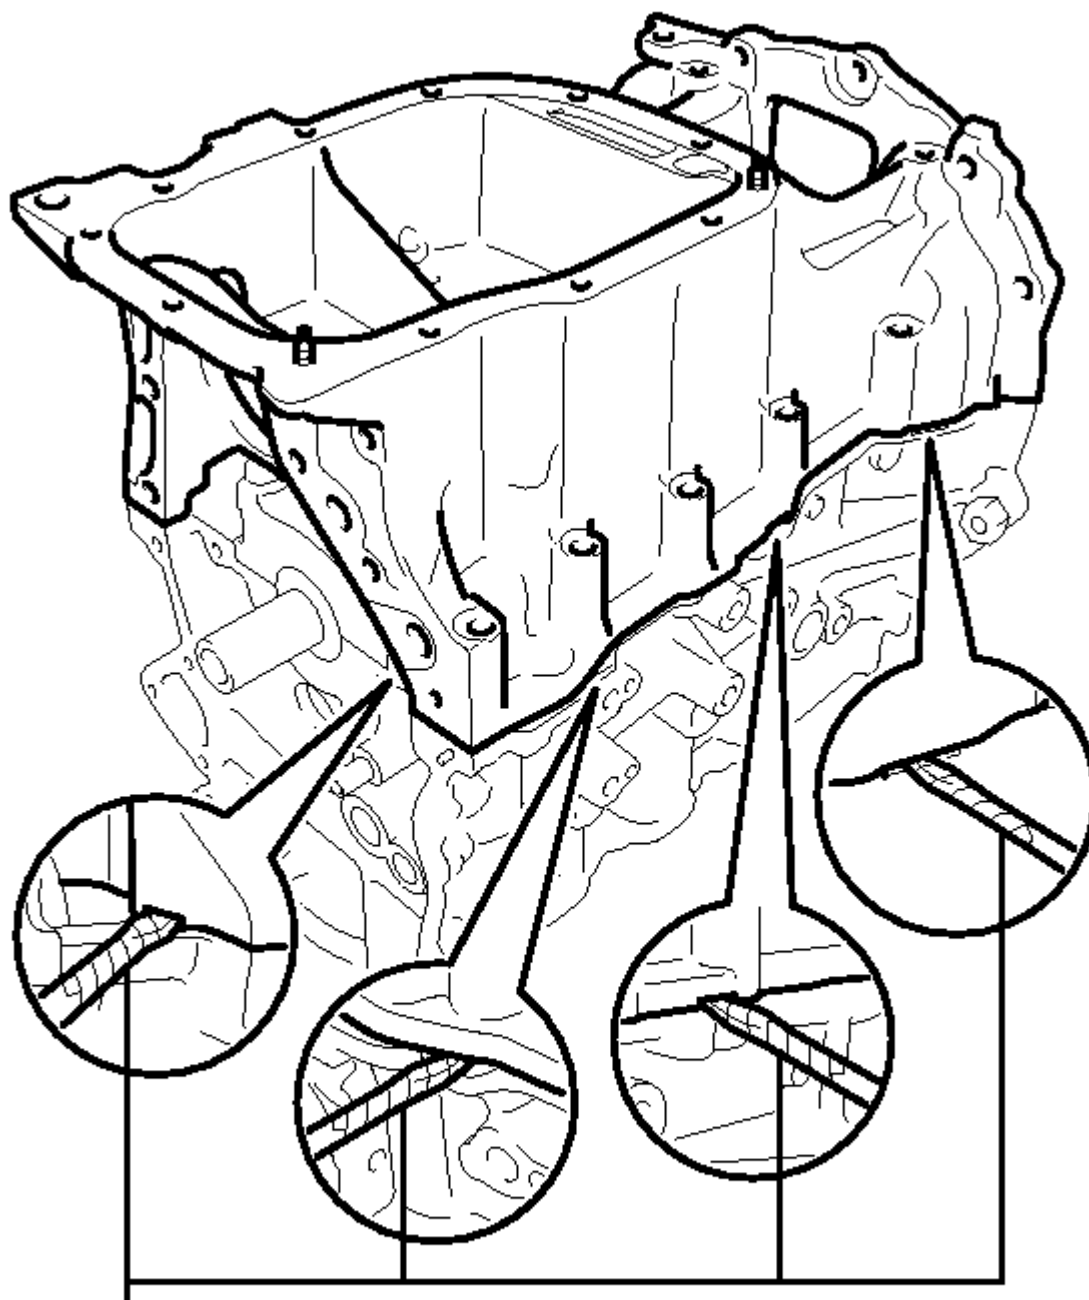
Identifying Stiffening Crankcase Assembly Bolts
